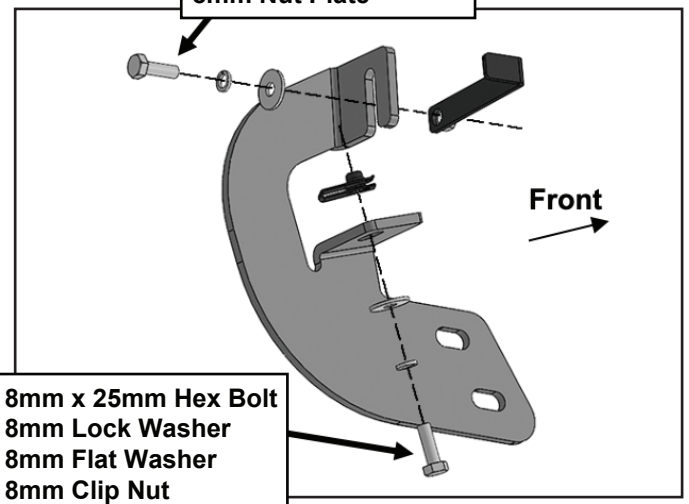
Attach (1) Driver/Left Front/Rear Mounting Bracket to the front location
